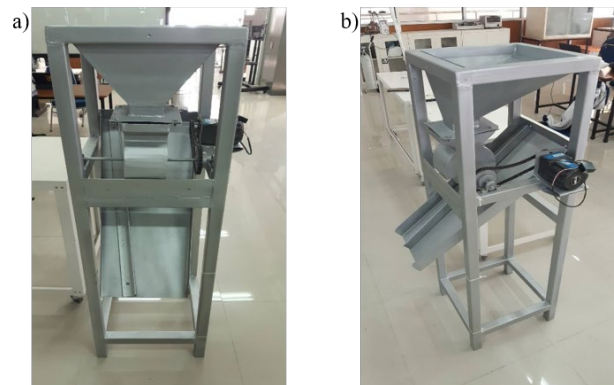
a) Front view, and b) Isometric view of the overall rotary feeder system, consisting of hopper, rotary feeder, guide plate, and motor drive system
